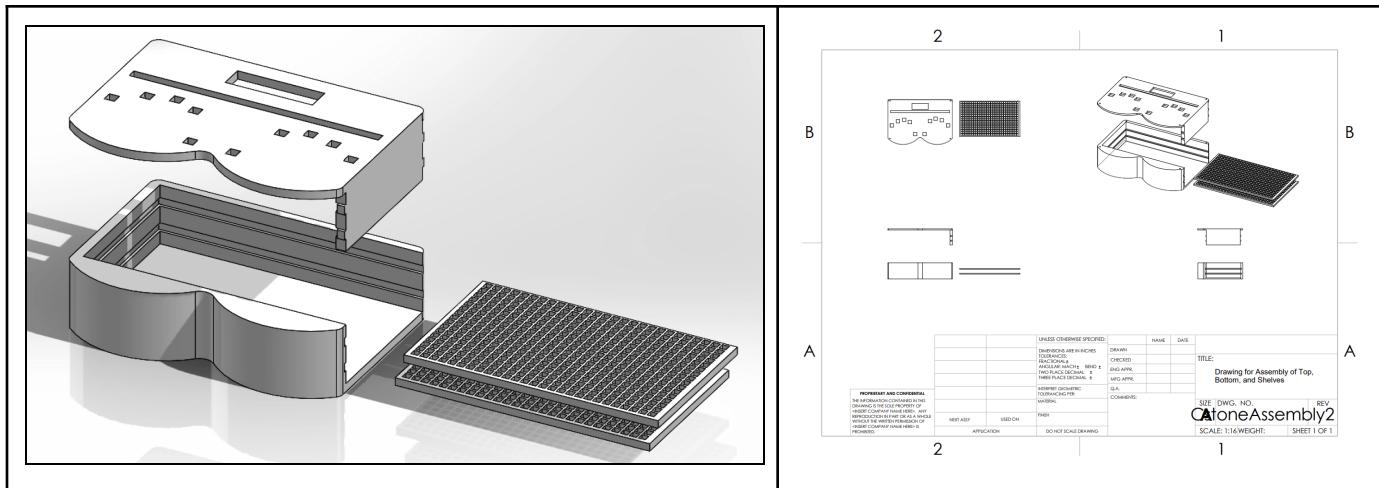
, SolidWorks assembly and drawing of faceplate, bottom, and shelves in exploded view (Team 3, 2024)
